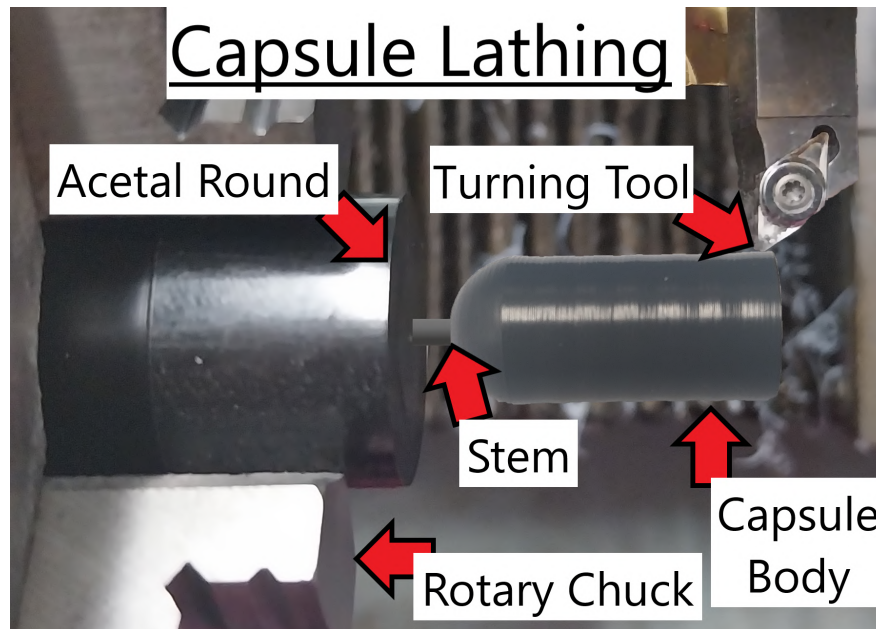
How capsule bodies are produced using the Boxford[®] CNC lathe.
